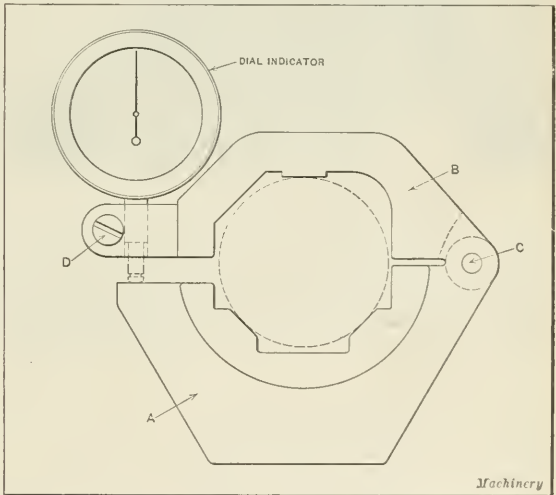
Three-point Dial Indicating Device for testing Crankshaft Bearings
